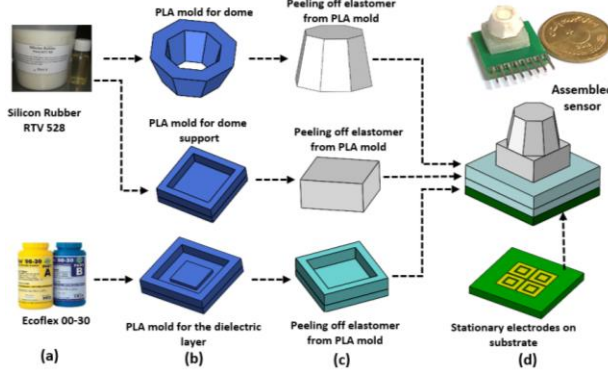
(a) Silicon rubber RTV-528 and Ecoflex 00-30 elastomer (b) PLA molds (c) elastomers (d) assembled sensor with the size reference of a coin.
